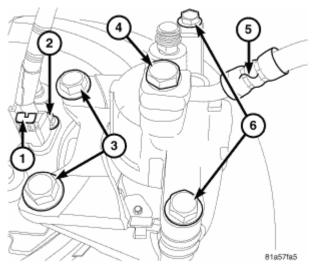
Identifying Bolts, Brake Hose & Brake Hose Banjo Bolt Courtesy of CHRYSLER LLC
